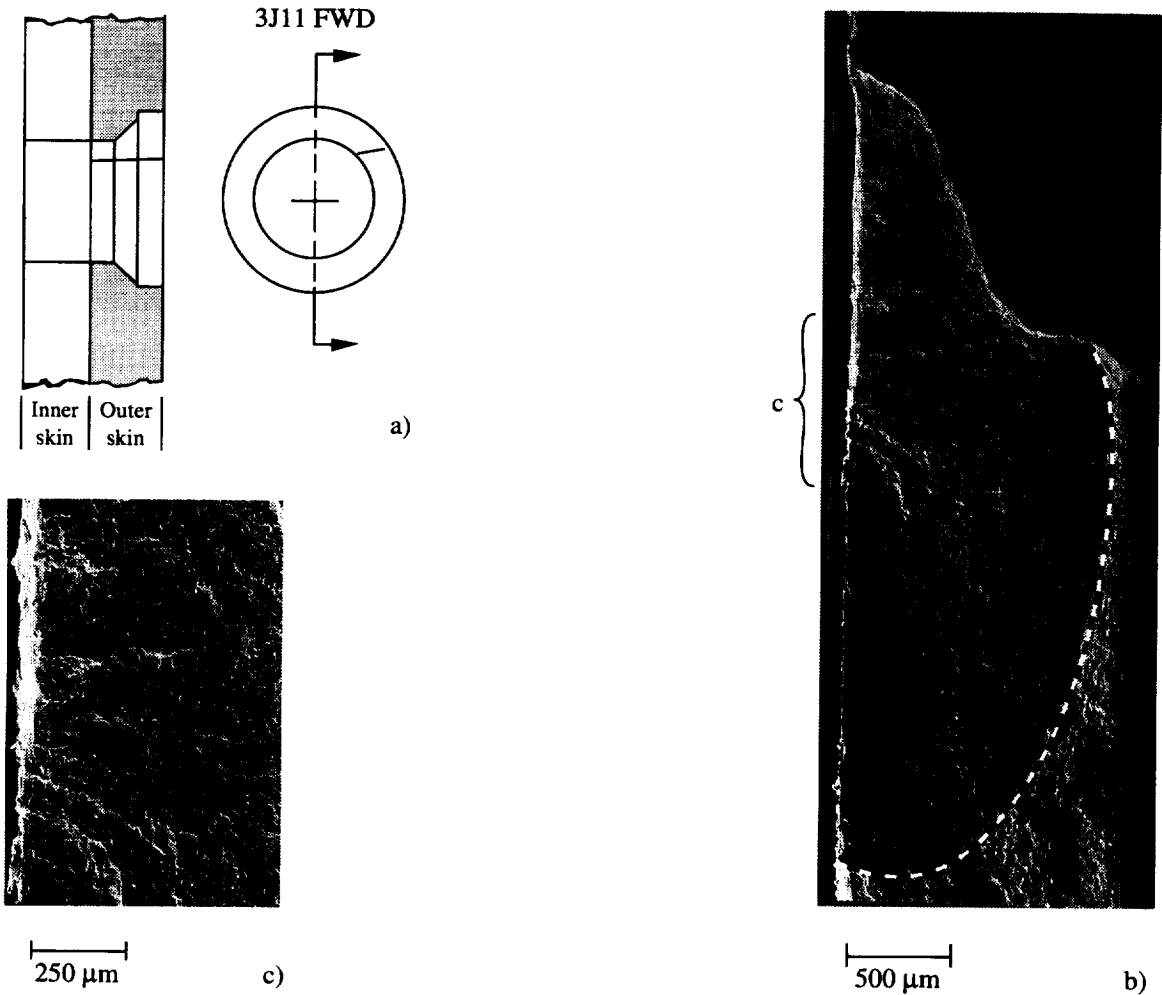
a) The schematic shows the rivet hole 3J11 configuration and the location of the outer skin fatigue crack oriented in the forward direction and about the 2 o'clock position. b) The SEM micrograph shows the fatigue crack at the rivet hole (top). The bracket locates the region of crack initiation along the faying surface and the dashed line marks the fatigue crack front. c) The SEM micrograph shows the crack initiation region "c" in Figure 9.26.b.
